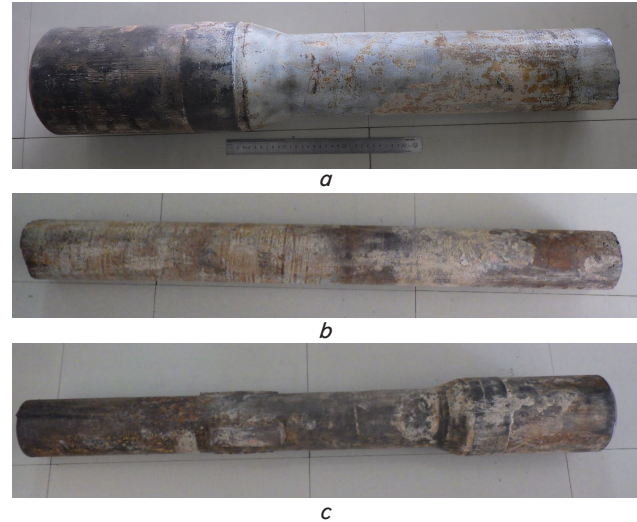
The as-received drill pipe material: a – drill pipe A; b – drill pipe B; c – drill pipe C
